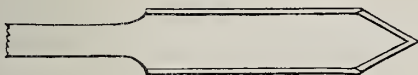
shows the form of the point tool. This tool is used as a right and left side tool, and also as a point tool for reducing hard material. The surface produced by this tool is in fact an extremely fine thread, like a screw.
